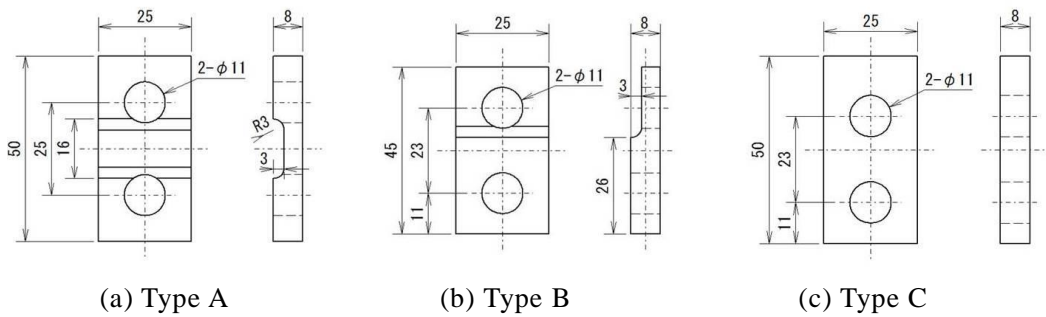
Geometry of crack arrester for welded specimen (mm).
